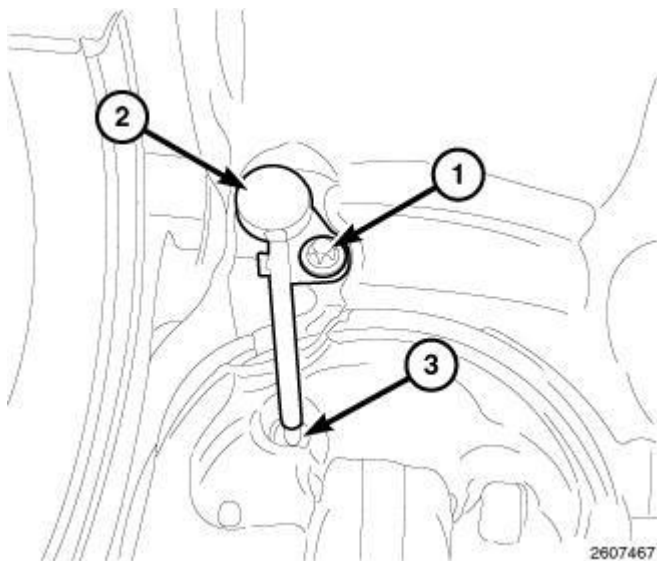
Oil Jet, Bolt & Engine Block
